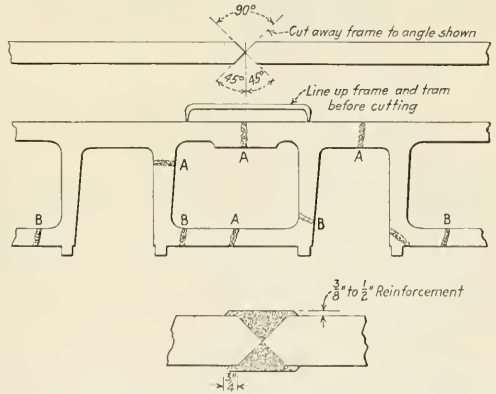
Location of Common Frame Breaks and Method of Welding with Gas
